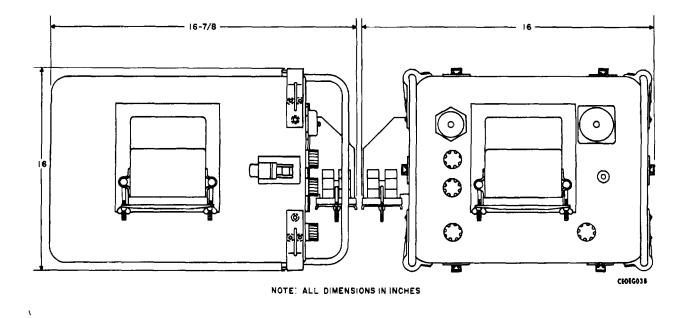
Radar Modulator MD-344/TPS-25, Dimensional Drawing.
